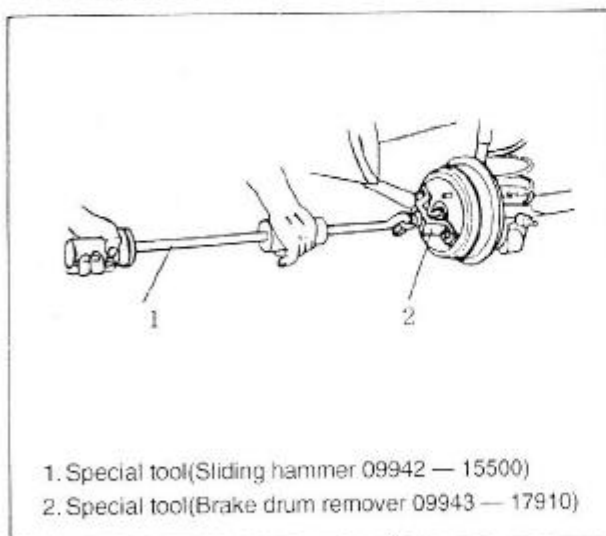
E — 4 REMOVAL OF BRAKE DRUM
